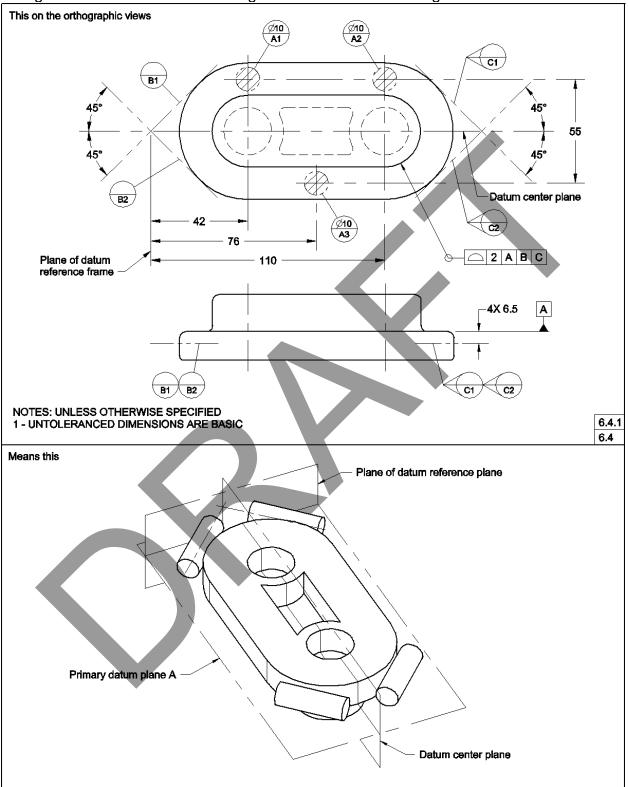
Movable Datum Target Simulators Establishing A Datum Center Plane
